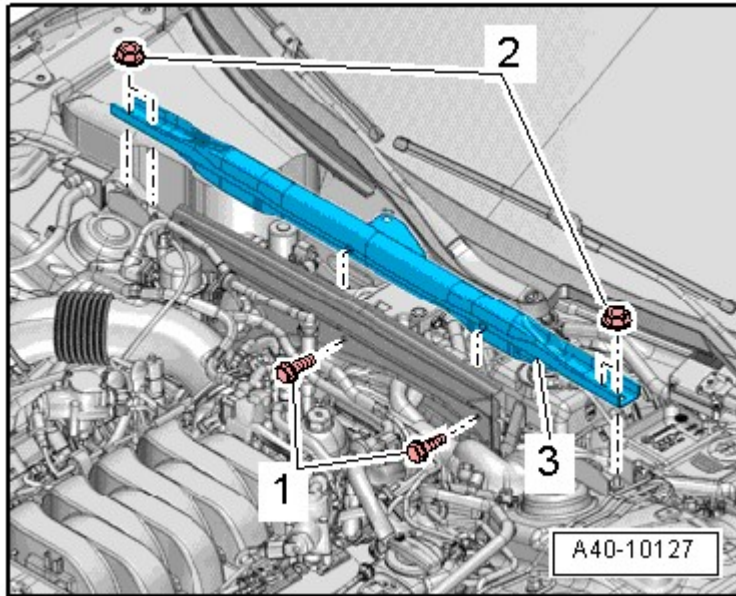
Identifying Bolts, Nuts And Tower Brace
